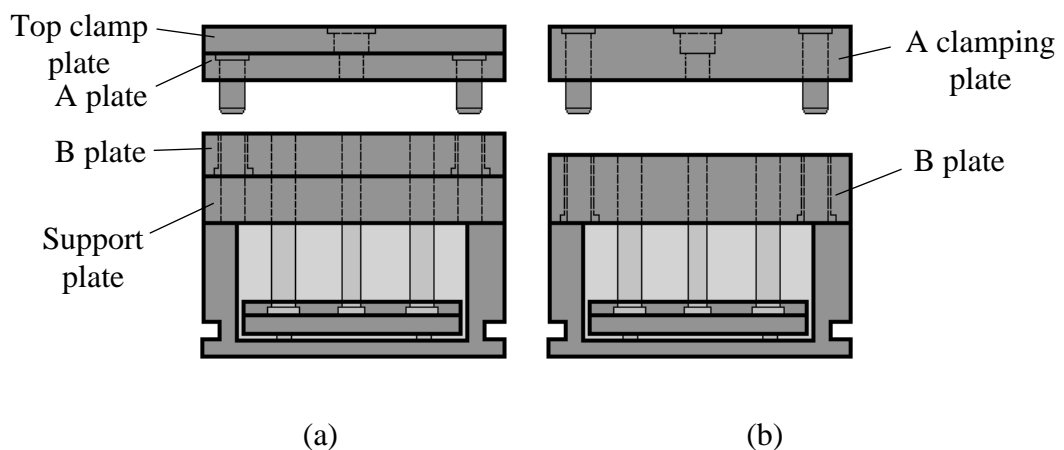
Injection mould model (a) A-style (b) B-style (Dominic et.al. 2000)
